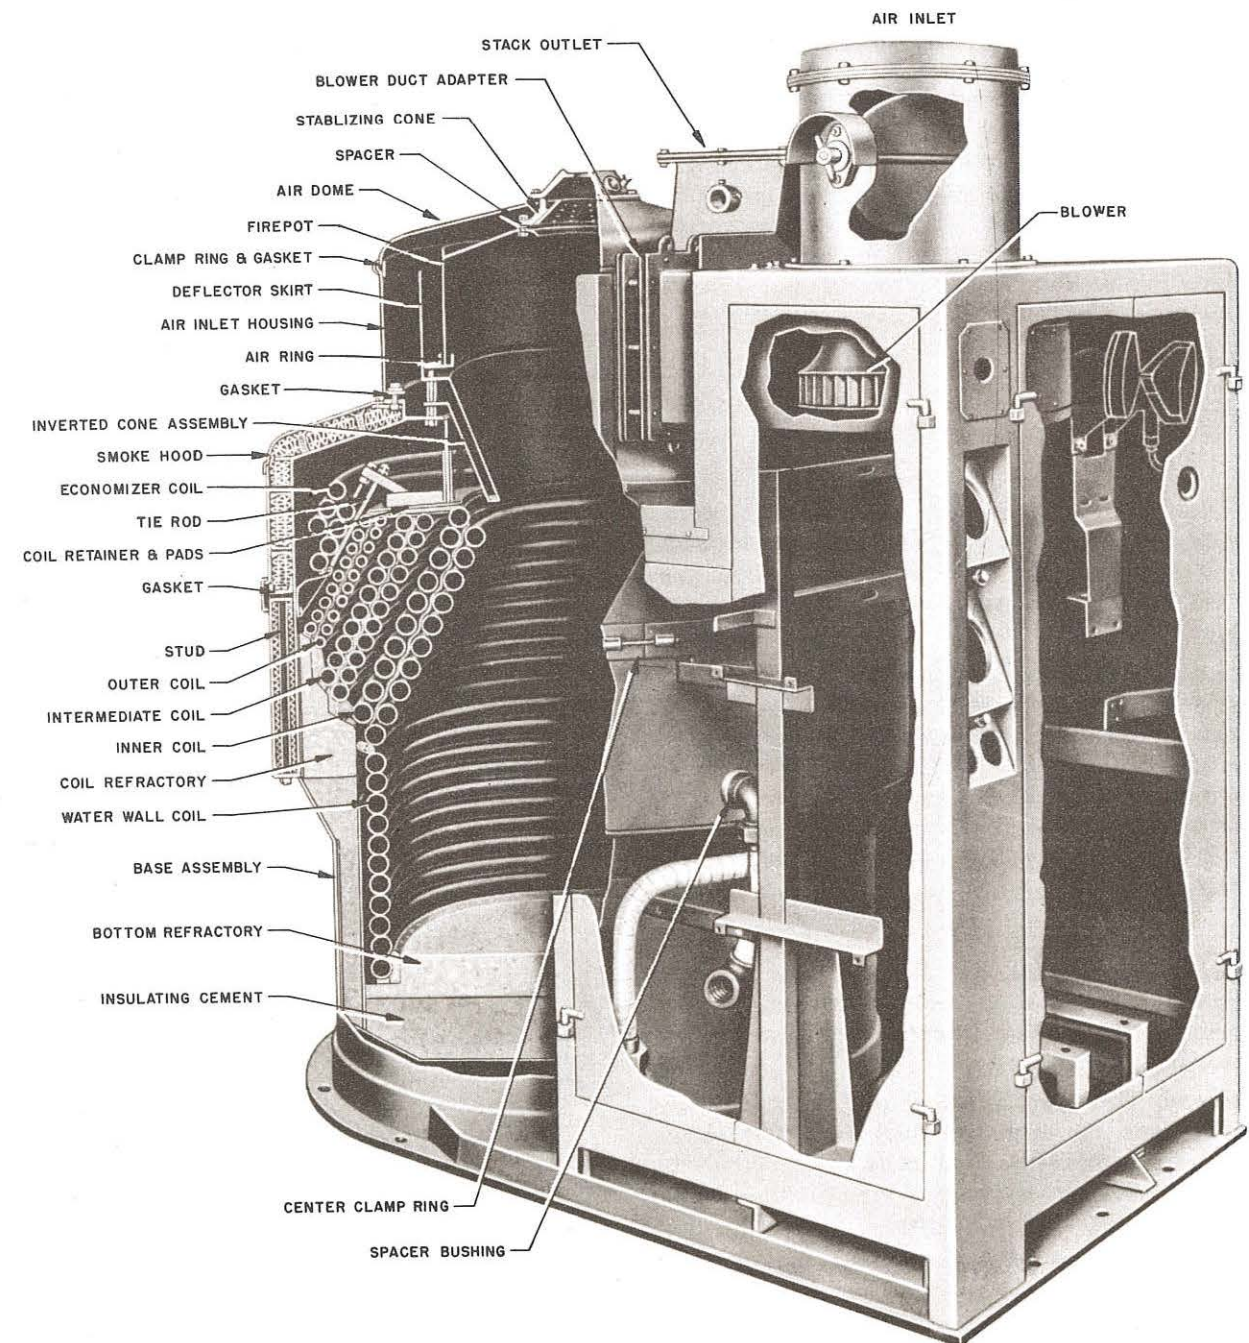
OK-4740 Boiler, Blower and Cabinet Assembly.
